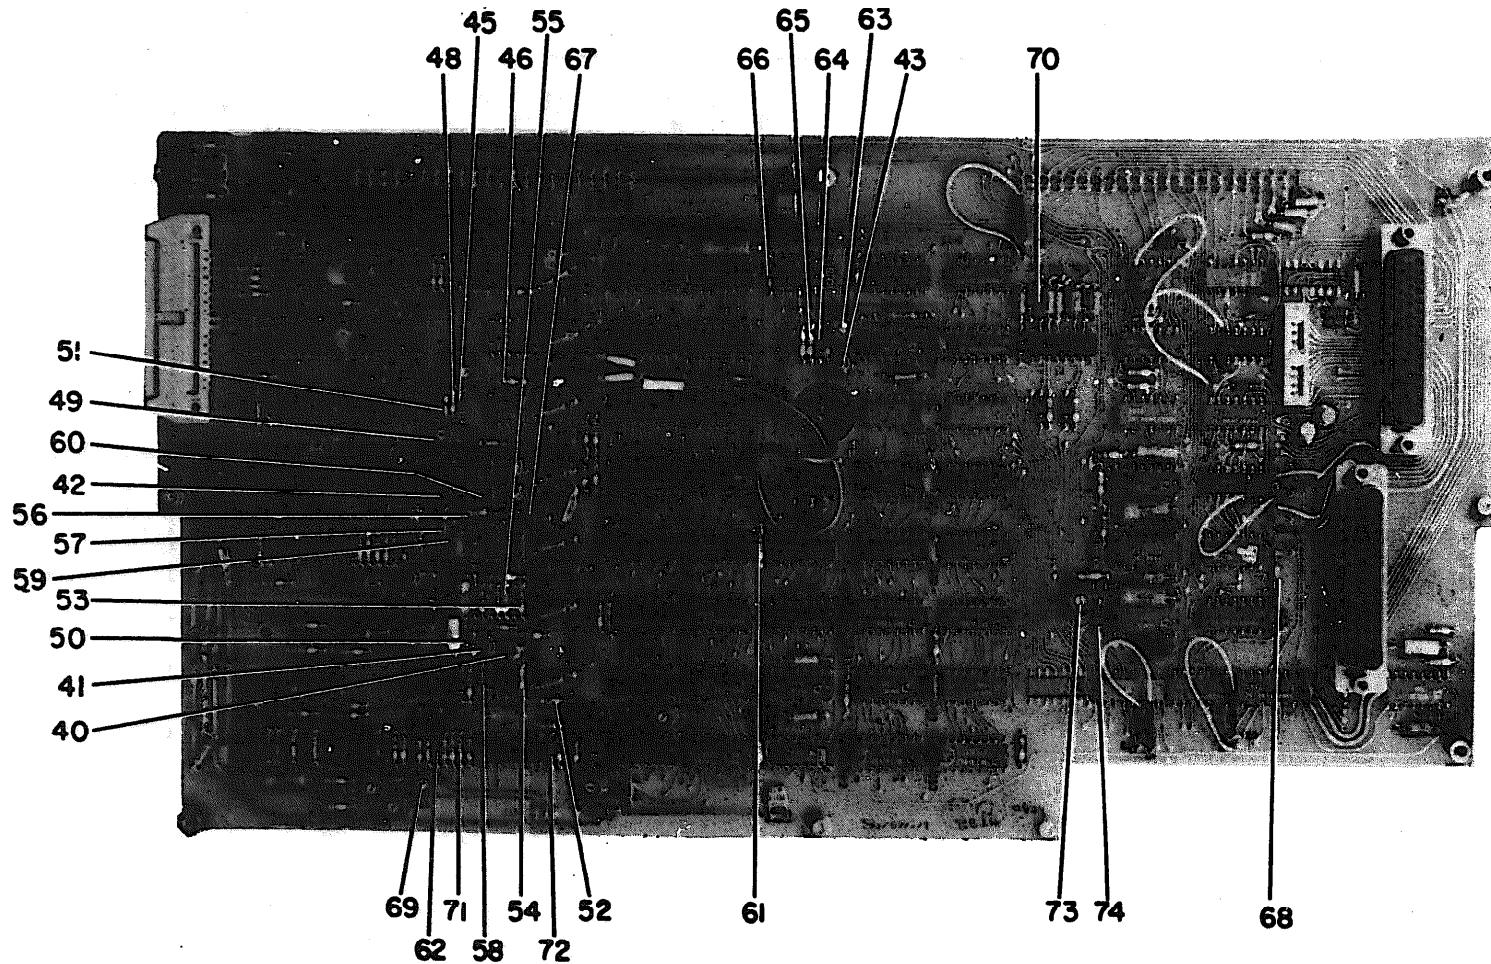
Circuit Card Assembly, Drive Electronics Module (Sheet 1 of 3).
